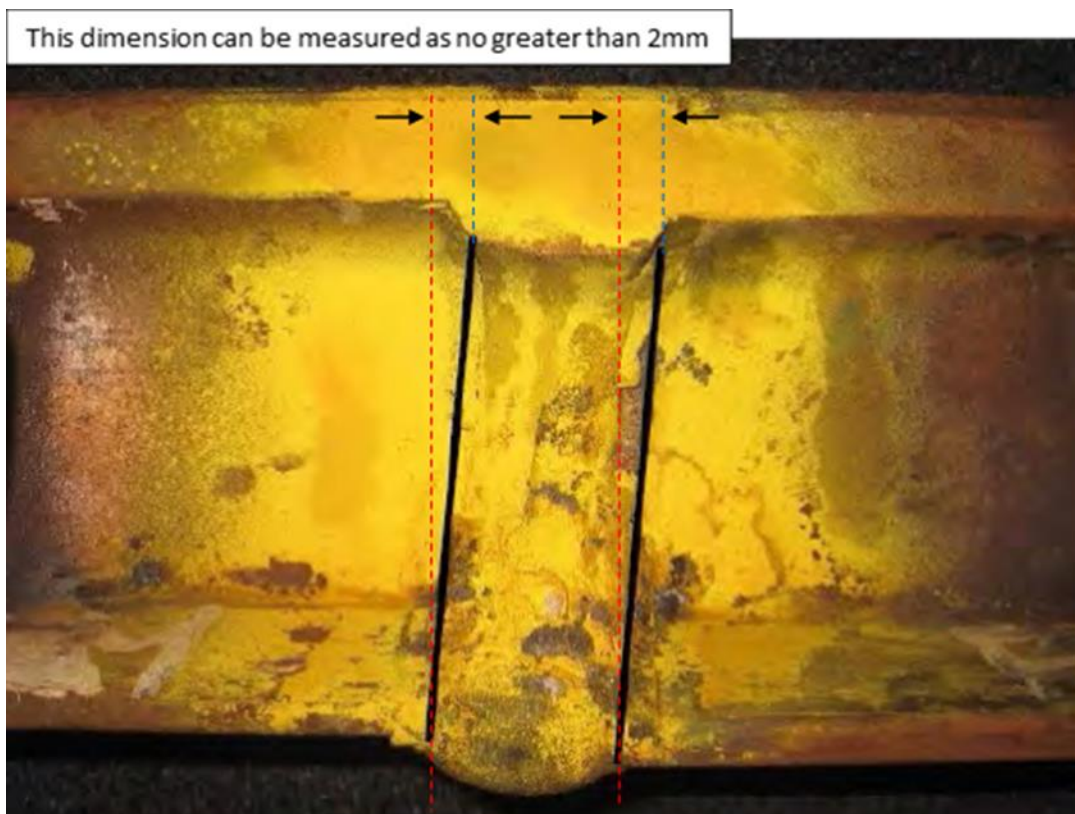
Failed weld due to misalignment of the weld collar 2
